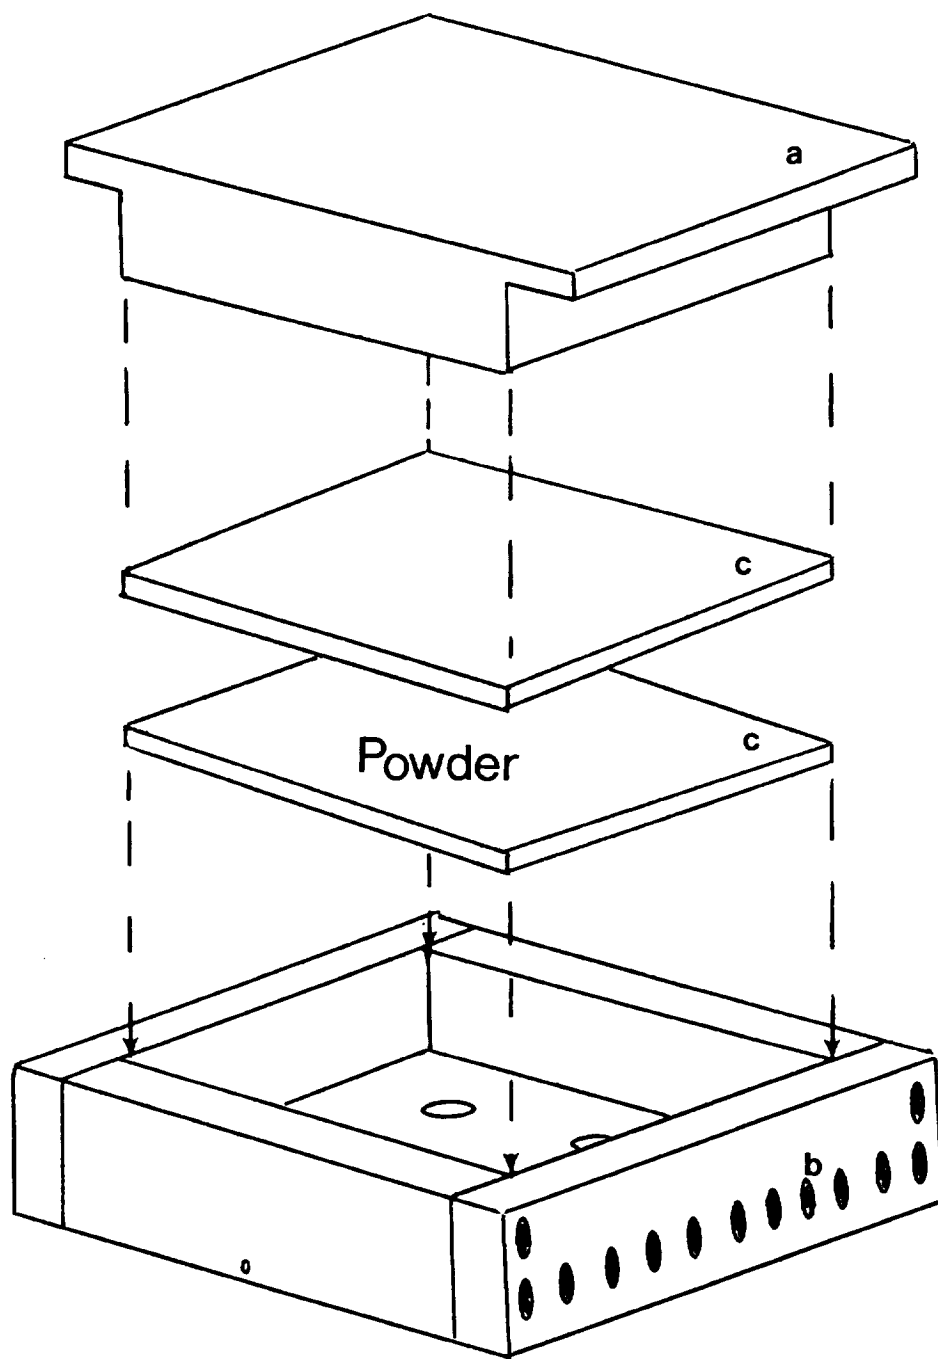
Schematic diagram of the 6" x 6" tempered steel mold, used to consolidate BMI/MDA and BMI/DDS powders. The labels denote the following: a = mold lid, b = 'U-shaped' bottom mold with detachable sides, c = platform plates for containing the powders.
